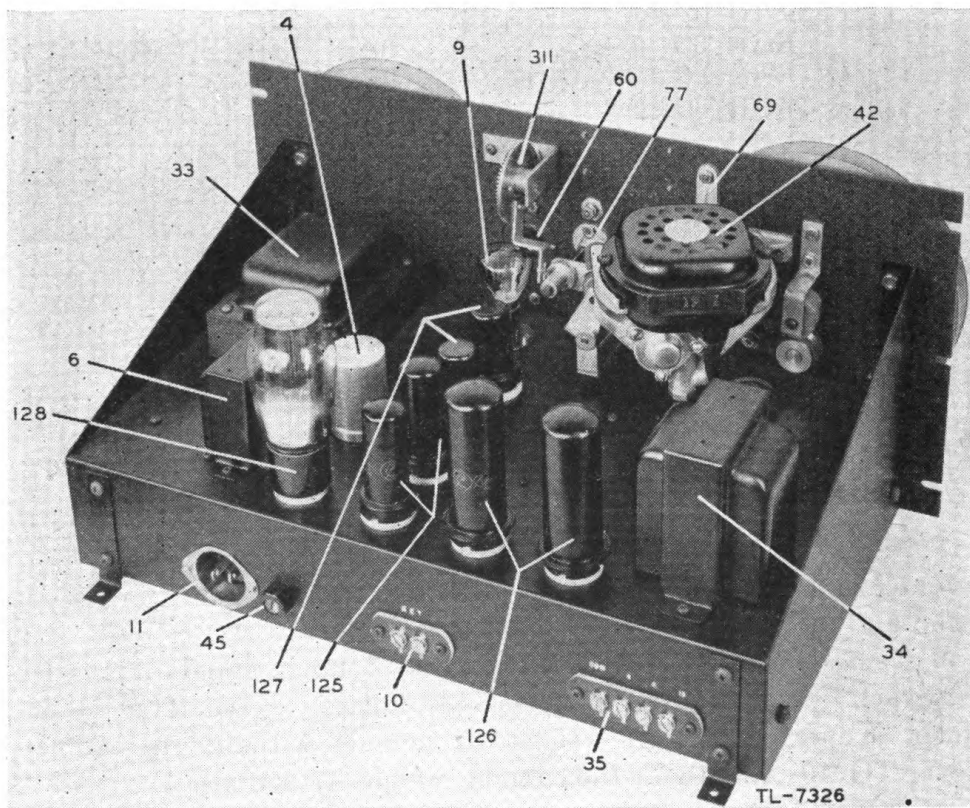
Keyer TG-10-1, rear view, cabinet removed.
